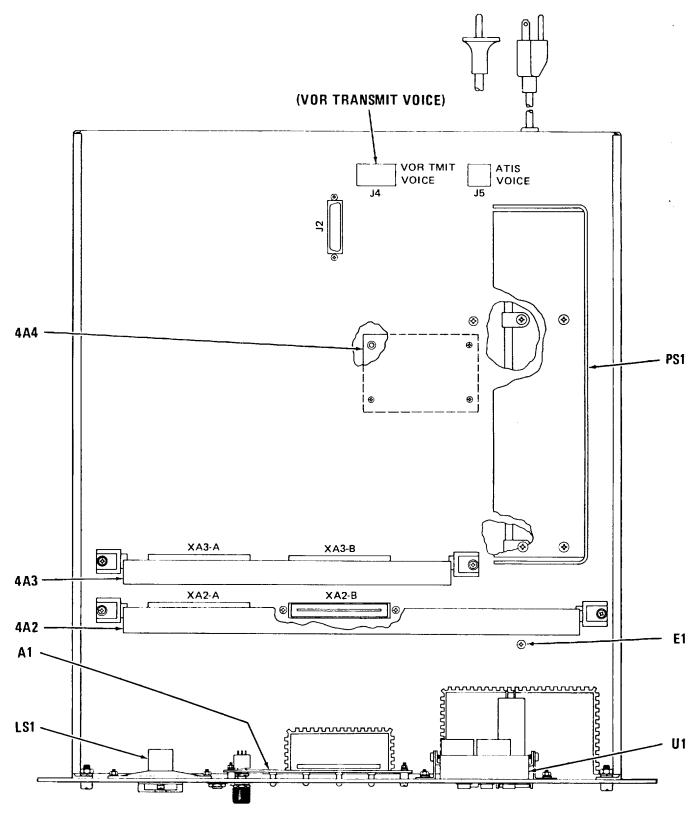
Control-Indicator Front Panel and Chassis-Mounted Parts Location Diagram (Sheet 1 of 3)
